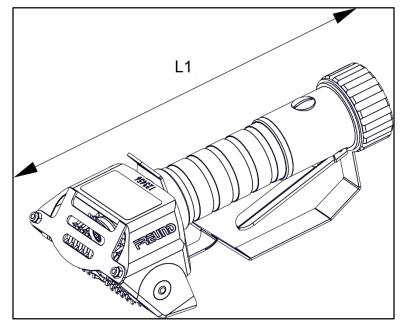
Mounted Hand-Skinner HSK8-P5
